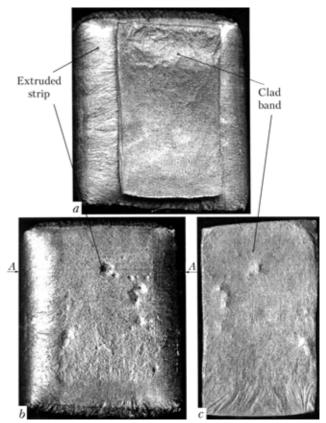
Appearance of a joint in alloy AMts (*a*) and defects on internal surfaces of extruded strip (*b*) and clad band (*c*) in electron beam heating in vacuum
